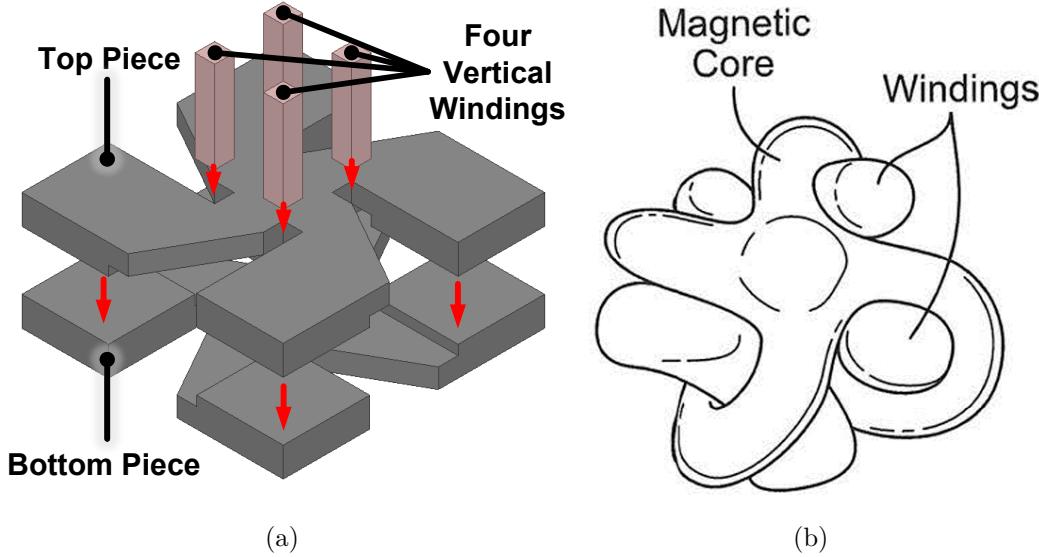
(a) Assembly procedure for a four-phase pinwheel inductor. Two identical core pieces are used, with the top piece rotated 180° in the x-axis and placed on top of the bottom piece. Four vertical windings are inserted through the core assembly. (b) Rendering of the concept of pinwheel magnetics. The magnetic core forms a 3D structure that effectively contorts itself around vertical windings to achieve multiphase coupling with low resistance and height.
